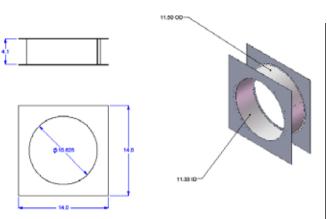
Montigo supplied RHS 102 required as venting passes through the first adjacent ceiling or wall for horizontal vent runs
